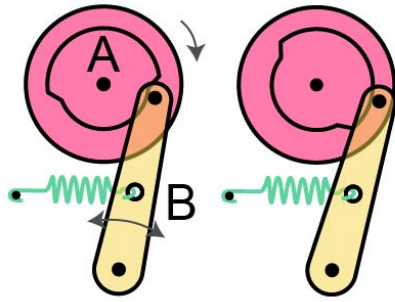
Cam mechanism. A. Cam wheel B. Follower
